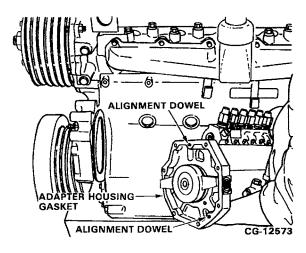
Install Injection Pump and Adapter Housing Assembly to the Front Plate
